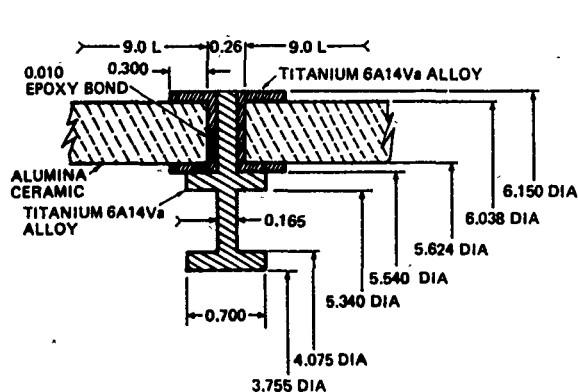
Components of NOSC Joint Ring Stiffener Design for Model-Scale Ceramic Housing Assembly.
